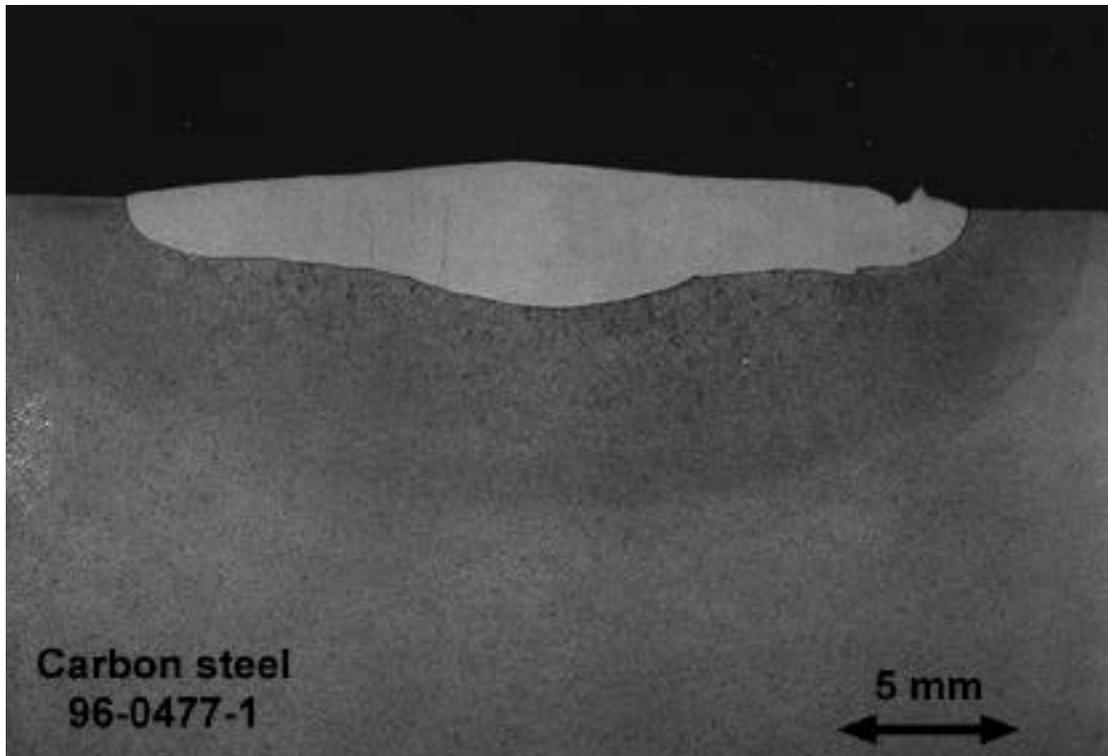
Cross-sectional view of weld bead made by depositing aluminum wire on carbon steel using the gas-tungsten arc welding process.
